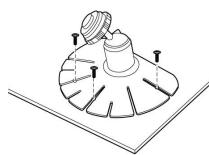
Screw Locations for Dash- or Console-Mount Installation
